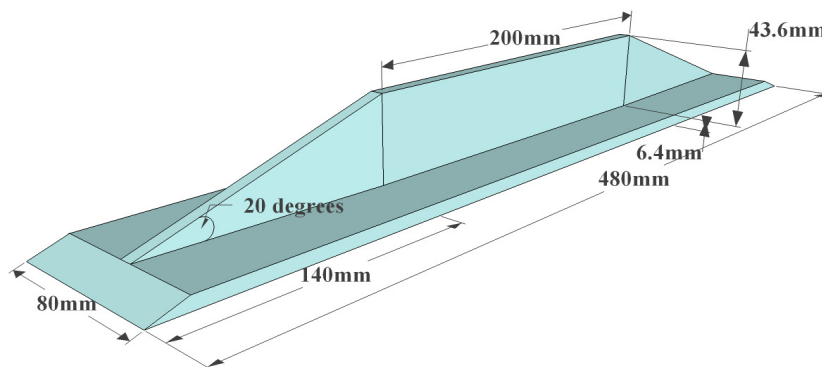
Vertical GFRP pultruded section stiffener used in specimen B5
